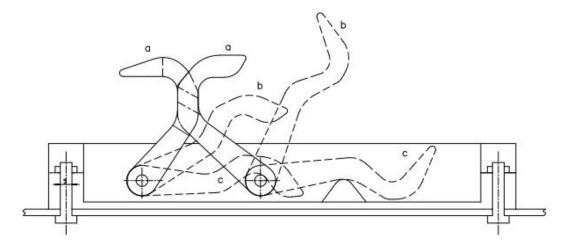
Three positions of the CL pawls: a - designing latch is locked; b - designing latch in intermediate position; c - designing latch in down position interface with ULD base plate.
